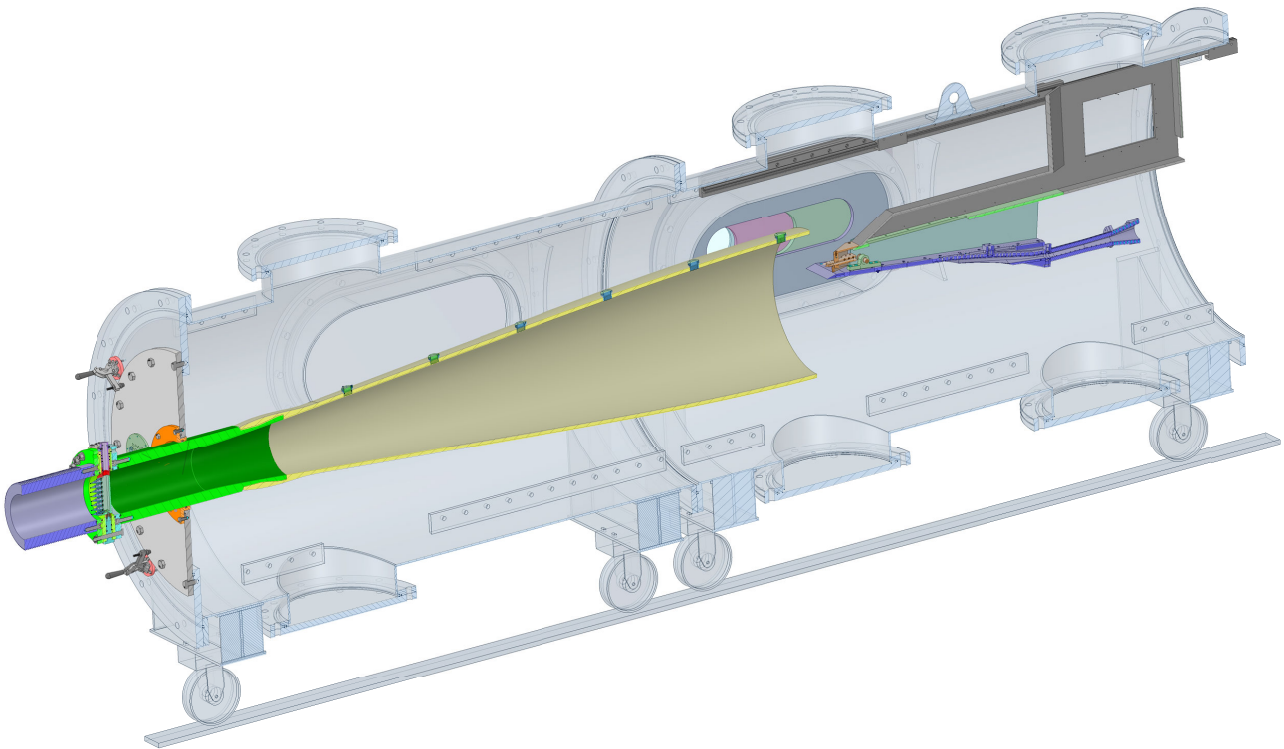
Cross-sectional view of the Mach 12 nozzle inside the X3 test section. The inlet Pitot rake is present as well.
